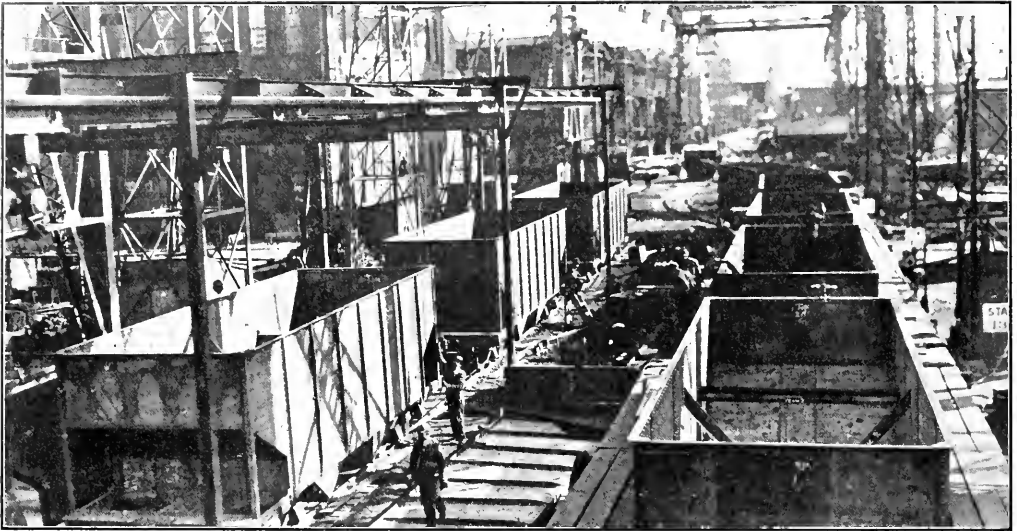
ERECTING STATION NO. 13 WHERE THE SIDES ARE RIVETED TO THE OUTSIDE HOPPER SHEETS AND CROSS HOOD
